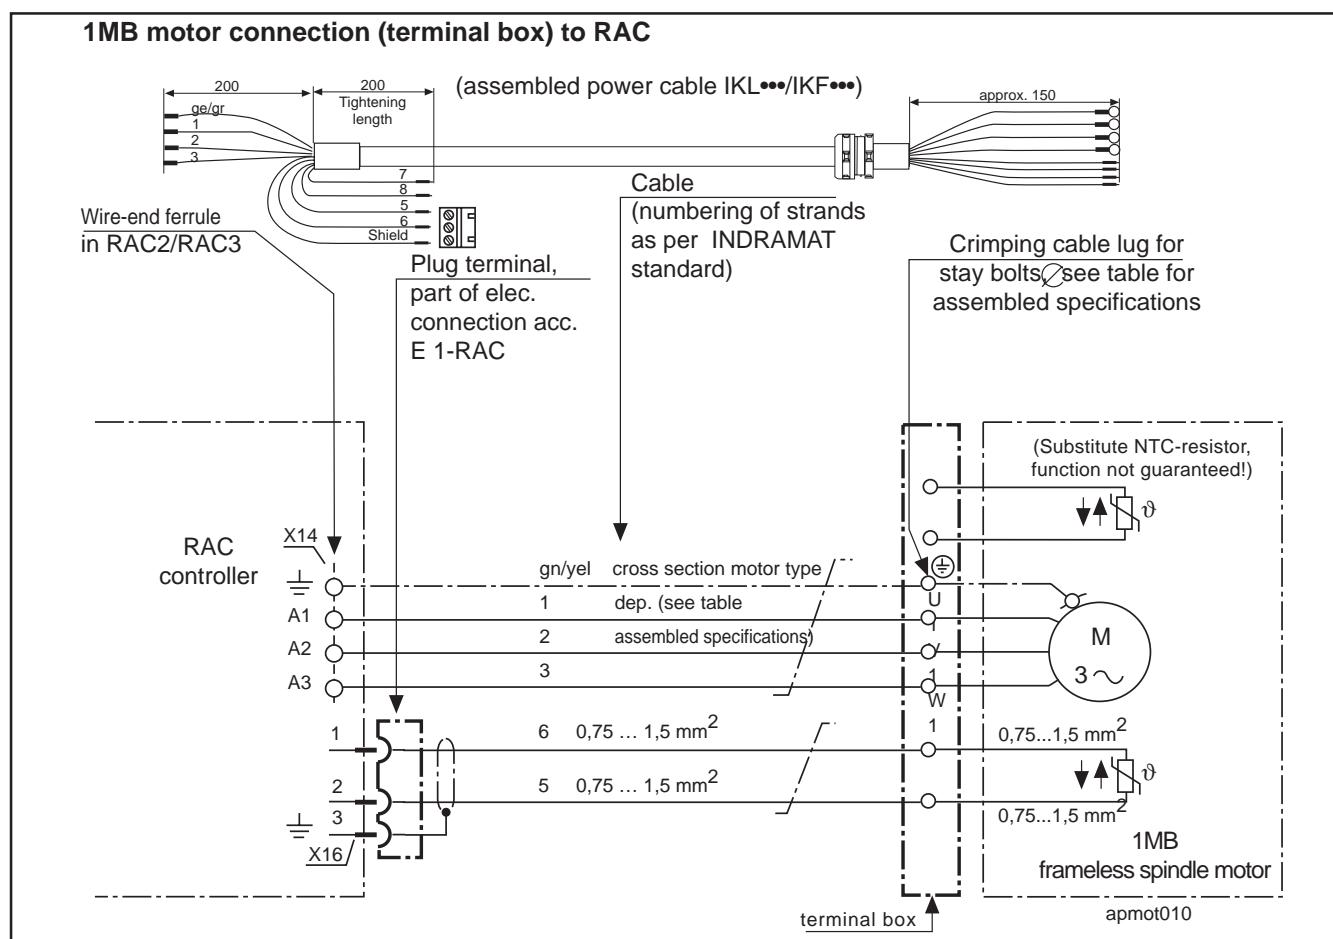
Connection via terminal box of 1MB frameless spindle motor to RAC controller
